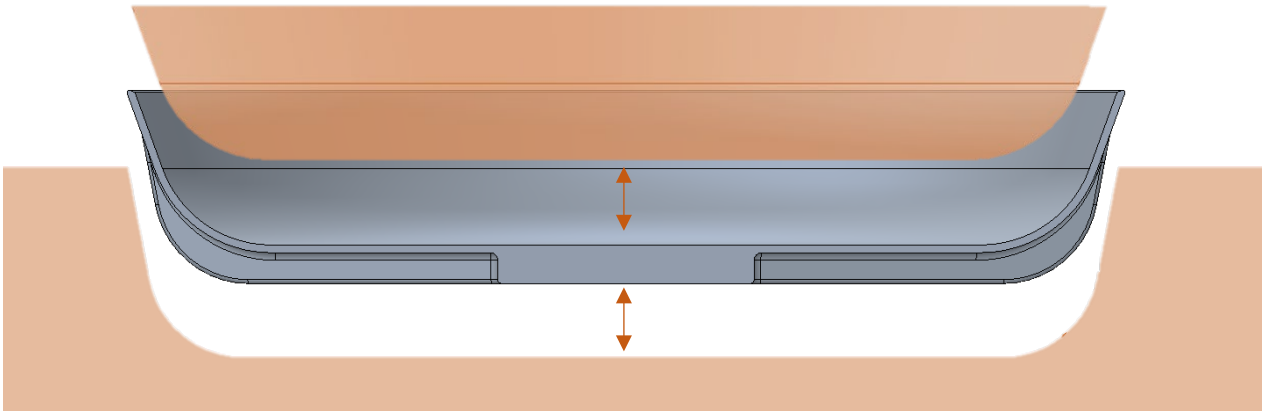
section view of the CAD model of prototype 2, with the possible die-parts in orange.
